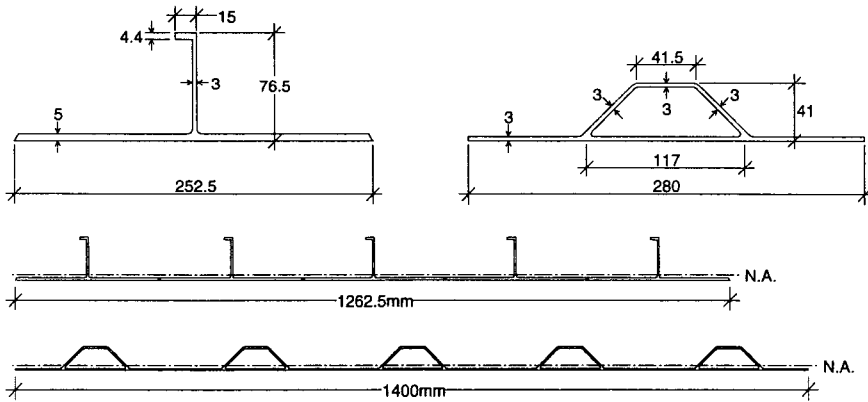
Cross-sectional geometry of extruded profiles and cross-section of specimens for plate tests.
